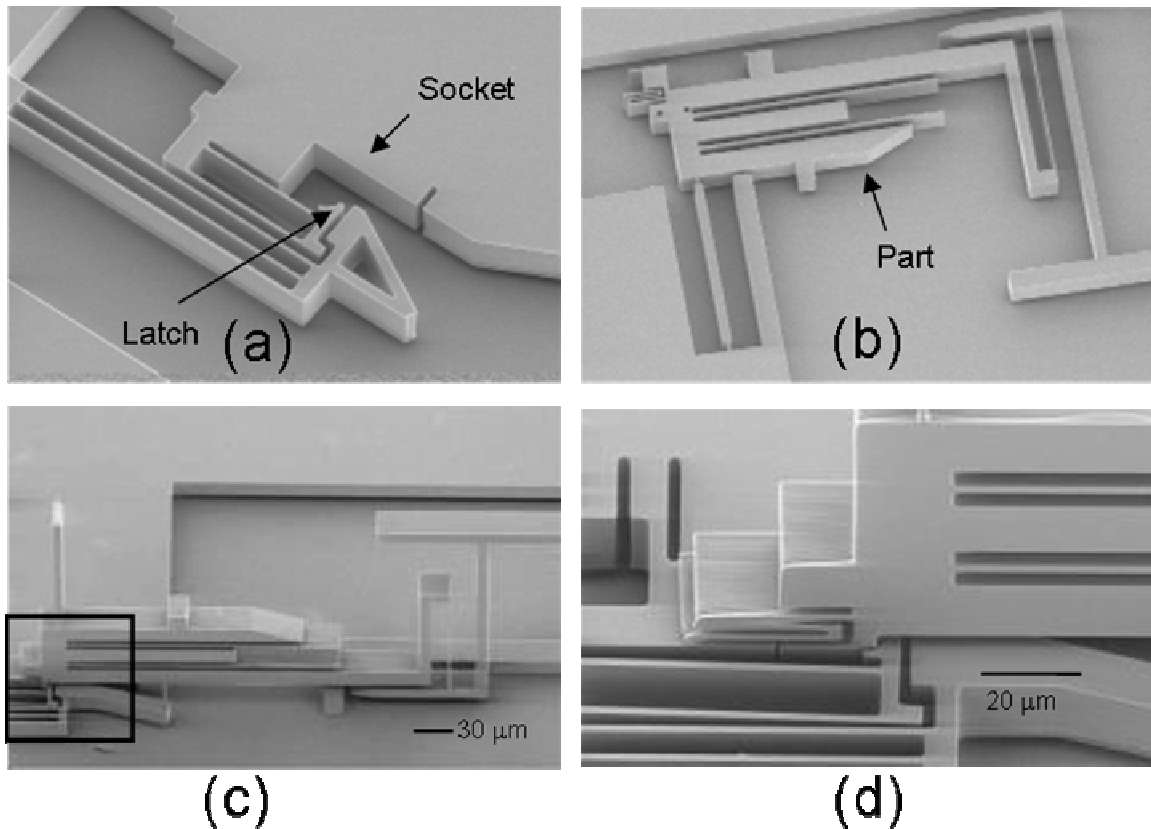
Snap Lock socket and mating part. (a) Snaplock socket, (b) part as fabricated (before assembly), (c) assembled part, (d) detail of assembled part
